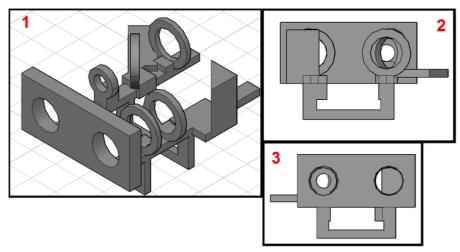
Isometric, Front, and Back views of the optical mount within the probe.
